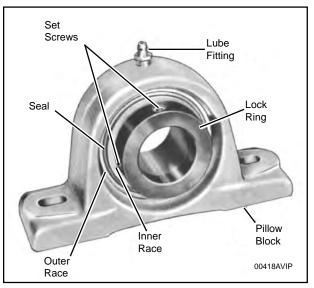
BEARING WITH SETSCREW TYPE LOCKING DEVICE
